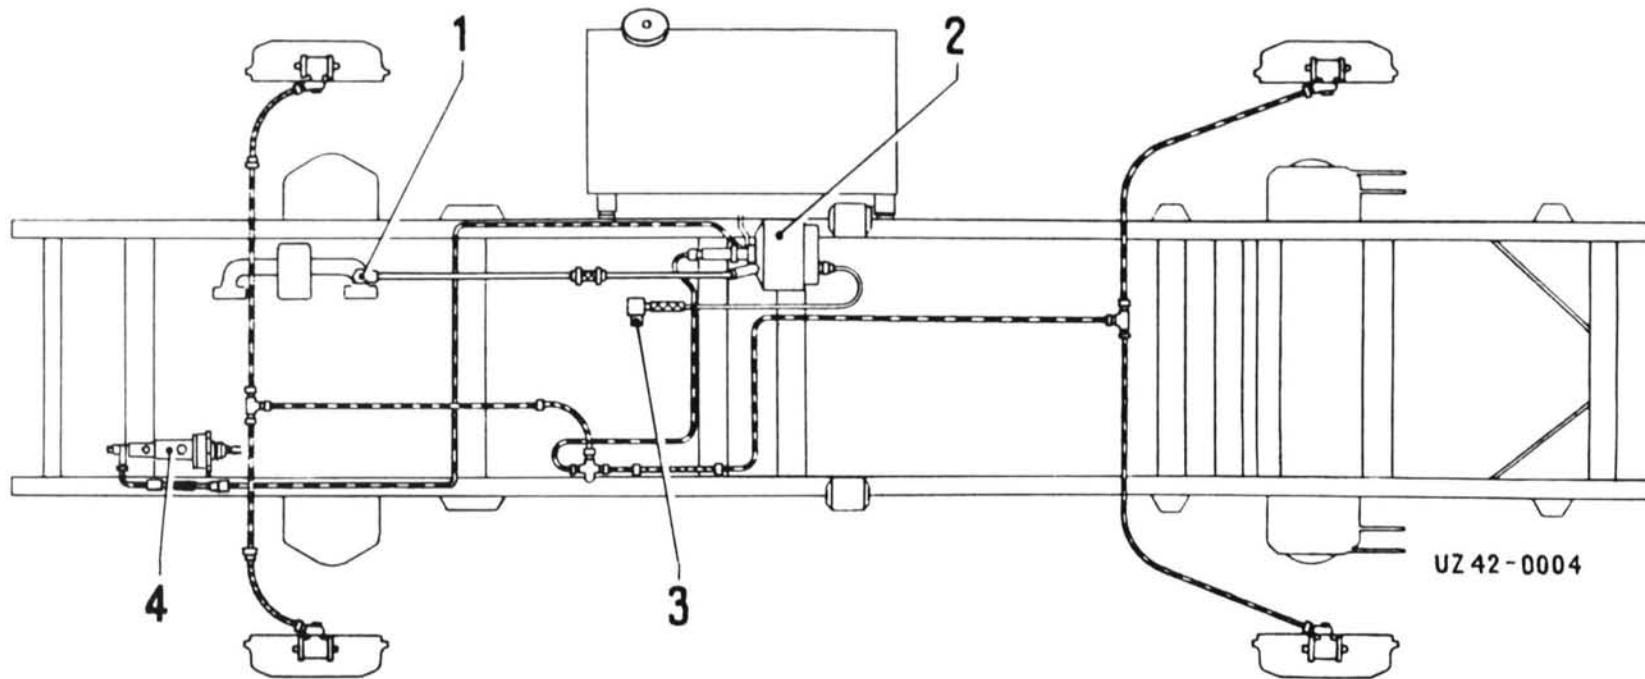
Schematic diagram of hydraulic brake system with vacuum brake assistance
